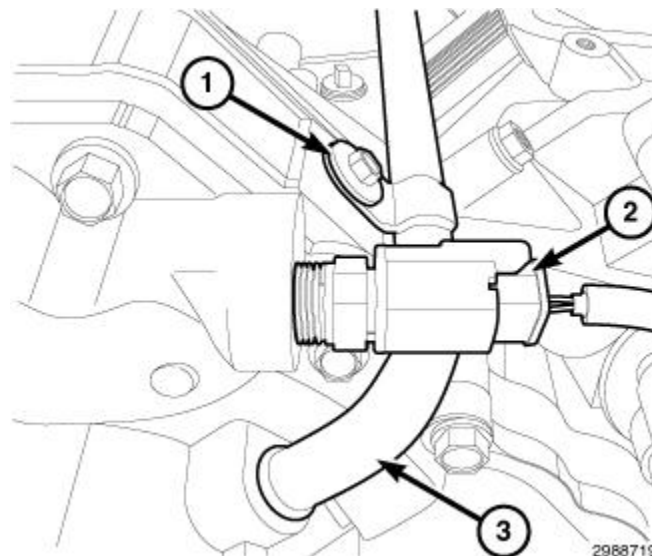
Coolant Temperature (ECT) Sensor Electrical Connector, Heater Tube & Retaining Bolt
